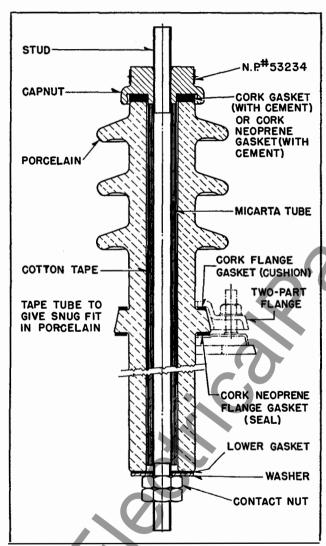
Cross Section of a Typical Bulk Type Bushing.
